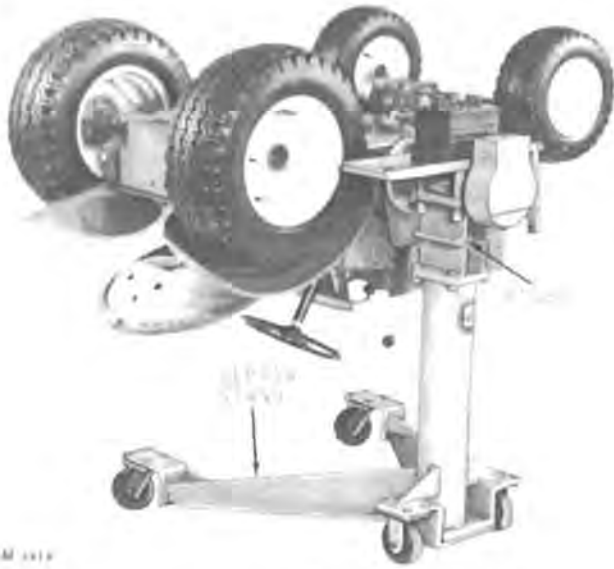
Tractor Inverted on Repair Stand for Easy Transaxle Removal
